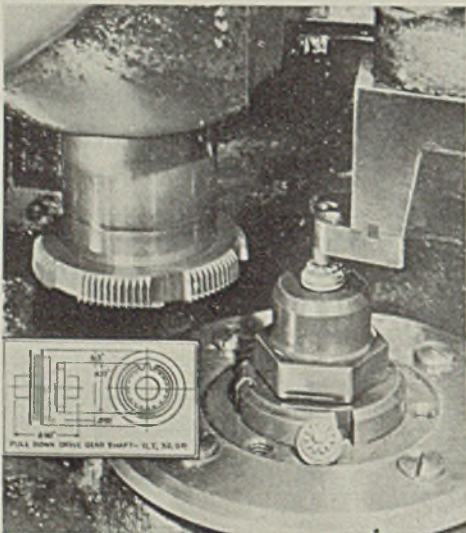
This gap cutter, making a 11-tooth 32-pitch gear, increased production 66 per cent, stepped up number of pieces between grinds by 800 per cent
